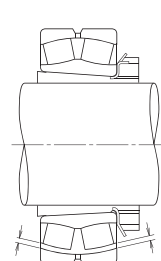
Clearance Measurement of Spherical Roller Bearing
